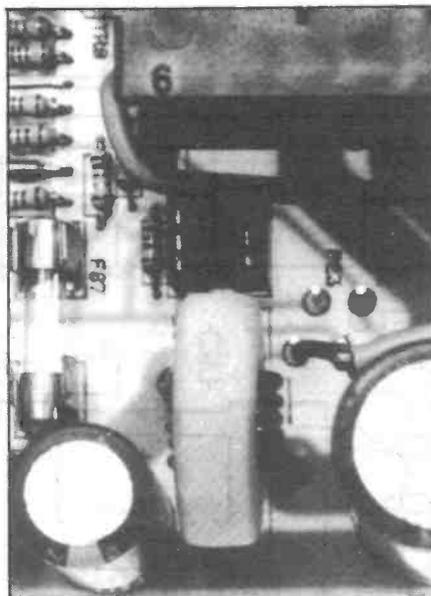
Close-up of the toroid inductor fitted into the PCB.
